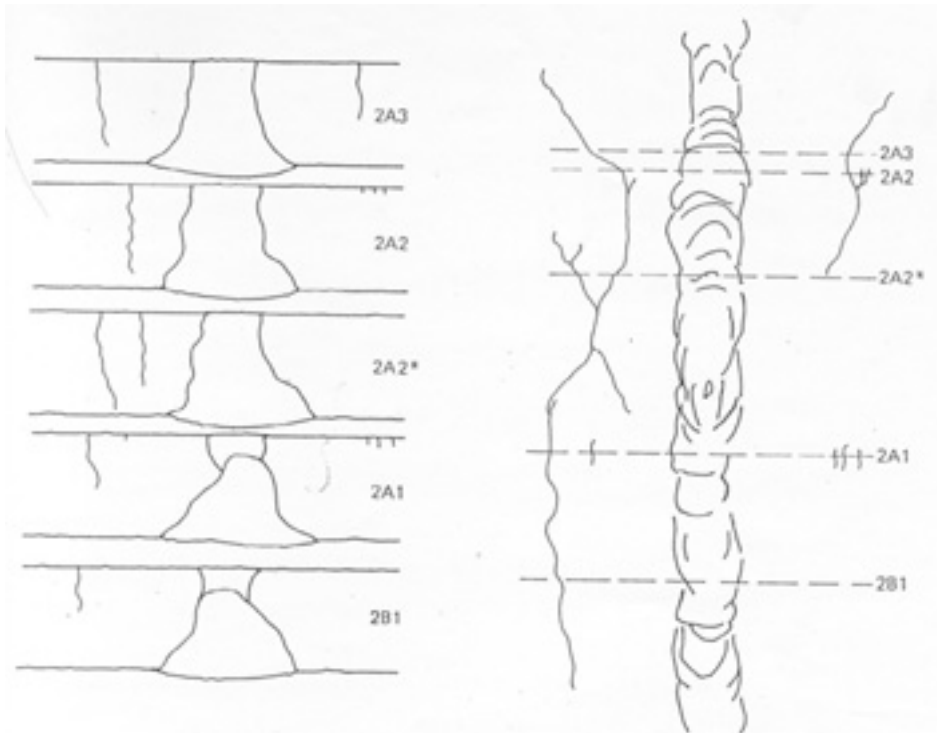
Example of IGSCC appearance on the surface and in five cross sections
